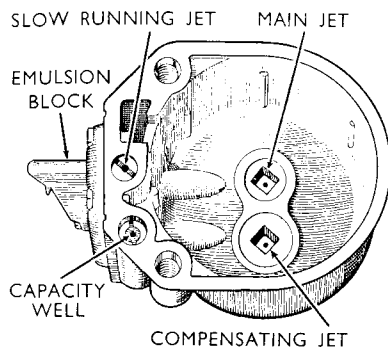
CARBURETTOR FLOAT CHAMBER JETS
